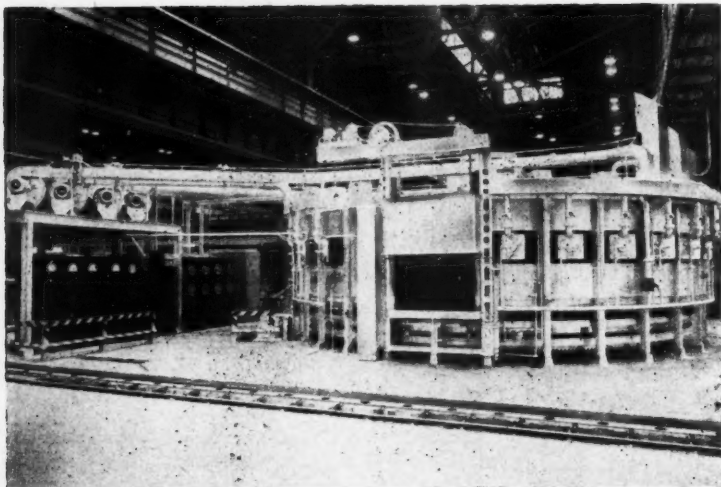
Rotary-hearth furnace for heating stock for forging. Of 30 ft. diameter, it is equipped with instruments that maintain workpiece temperature within close limits
